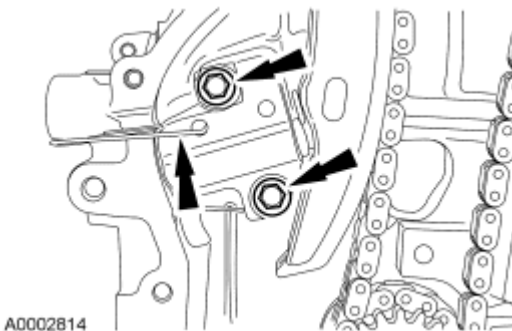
Locating Timing Chain Tensioner Bolts And Paper Clip
